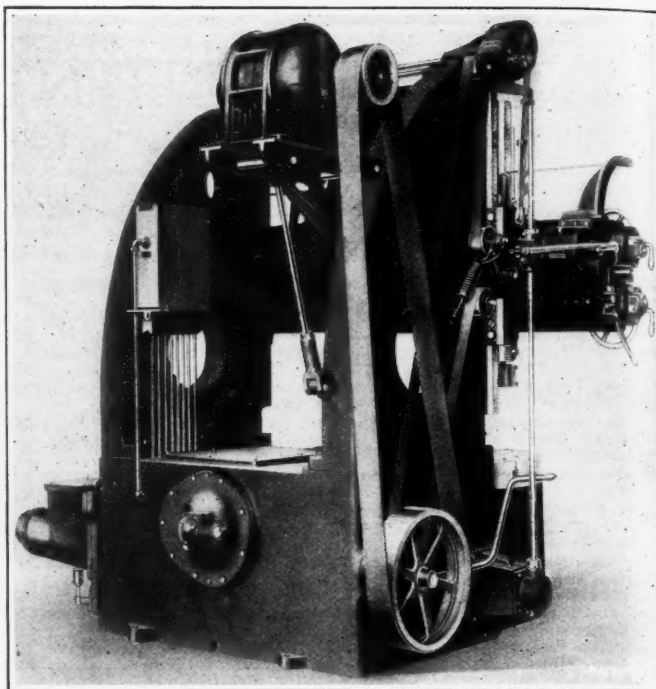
Arrangement of Continuous-flow Oiling System, Motor Drive, and Left-hand Clutch and Brake Lever
